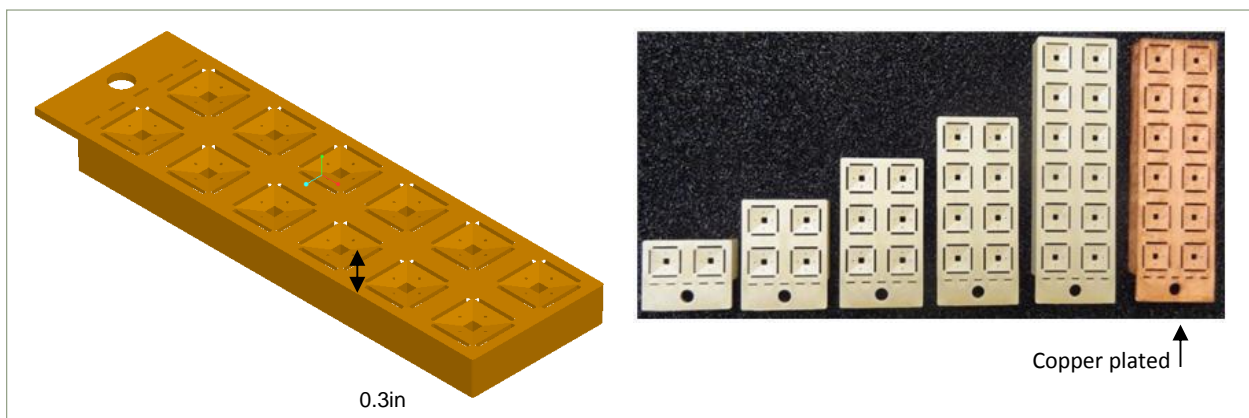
Injection Molded, Gen 1.0 droopy bowtie turnstile radiator array: Left: 2x6 drawing; Right: injection molded prototypes
